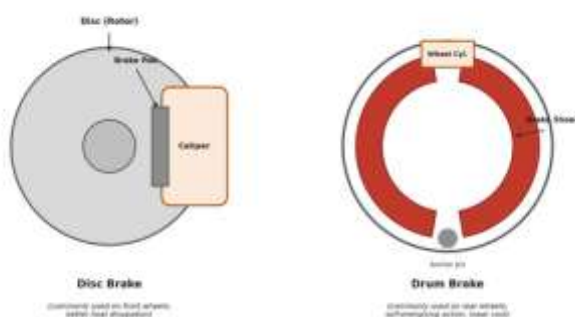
Comparative Schematic of a Disc Brake Assembly and a Drum Brake Assembly
